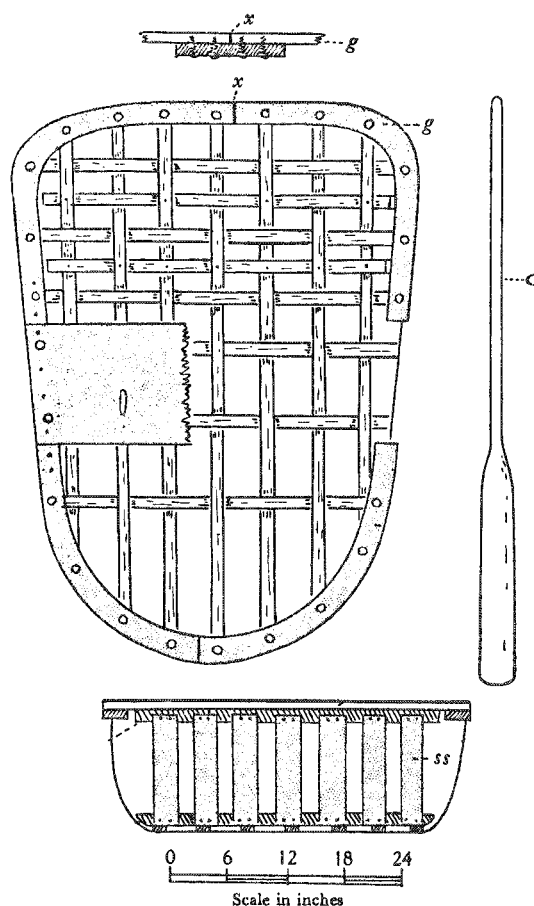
Construction drawing of a twentieth century coracle from the River Taf, Wales. After Hornell, 1936: fig. 5.
